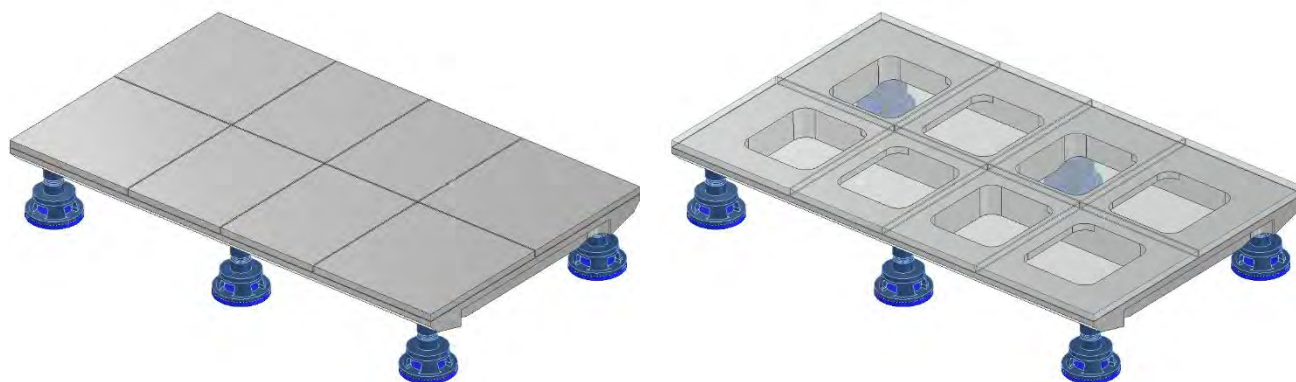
Compressor internal optical table integrated with the support frame (the structure is shown on the right) and with the six support posts (legs). The support posts are equipped with a double bellows structure, not indicated here.
